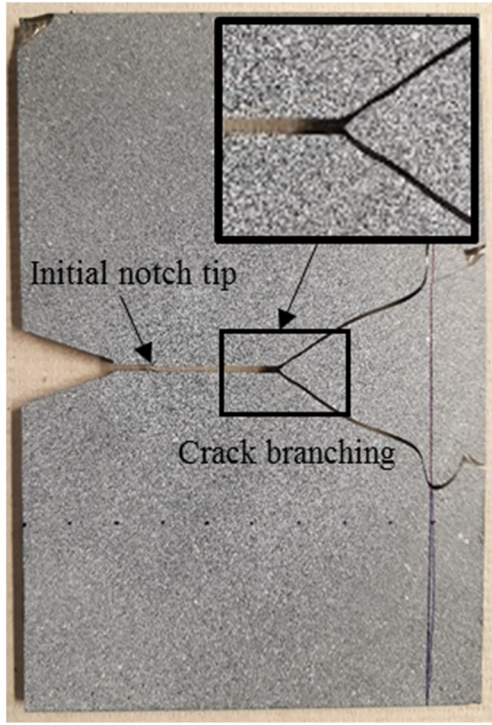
Reconstructed fractured specimen used in DIC experiment
